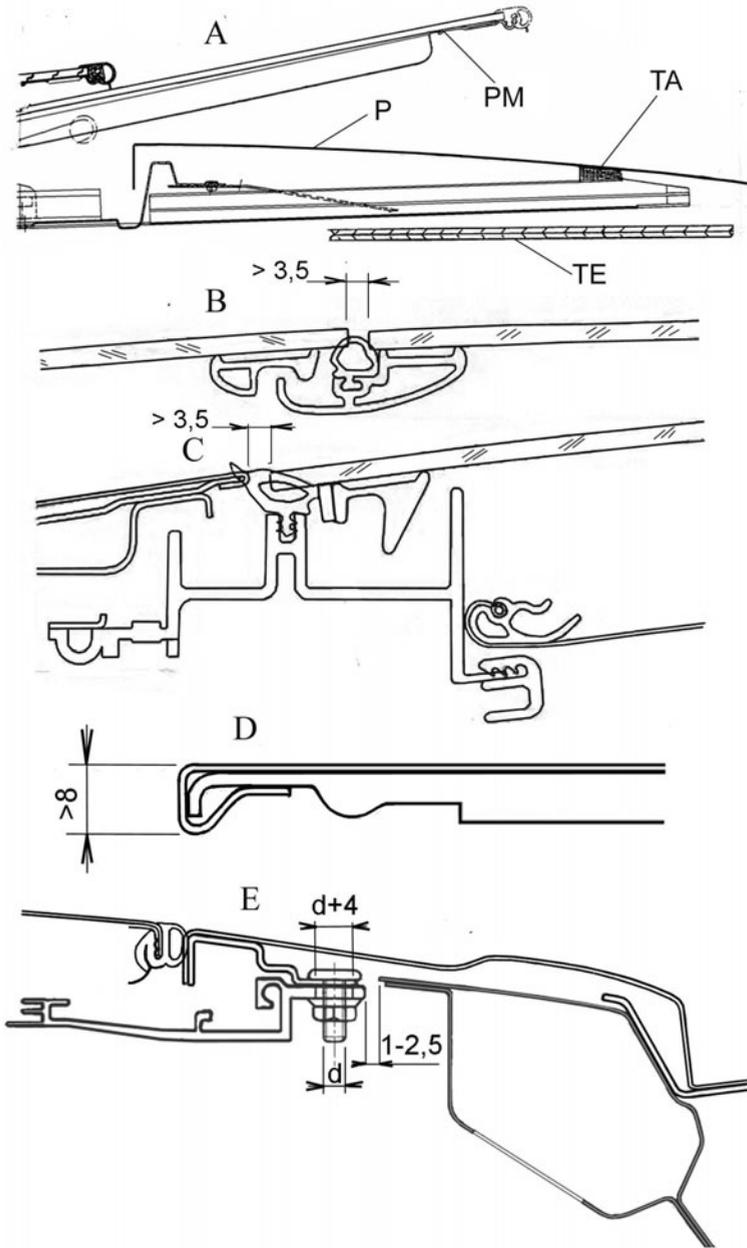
Examples of different sunroof sections. A: sliding over roof P; PM: tilting movable panel; TE: trim curtain; TA: damping pad; B, C: glass multiple panels with the minimum specified gap between two glasses; D: metal sunroof; E: side section with critical dimensioning.
